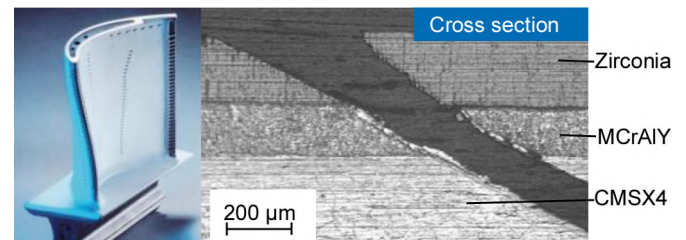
Laser drilling of cooling holes: Nickel-based turbine blade coated with a ceramic wear resistance layer with cooling holes [25] and cross-section of a cooling hole drilled in a CMSX-4 turbine blade coated with a MCrAlY and zirconia wear resistance layer [89].
